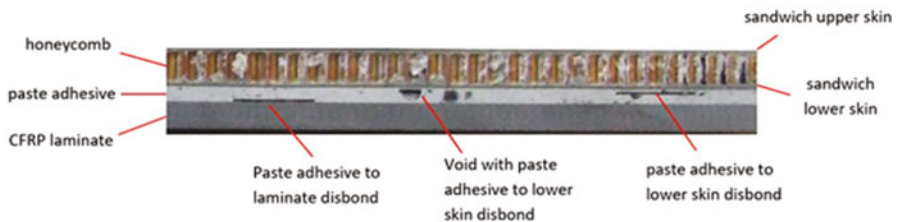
Section of honeycomb sandwich structure bonded to CFRP laminate (either spar or rib) by paste adhesive showing several disbond issues
